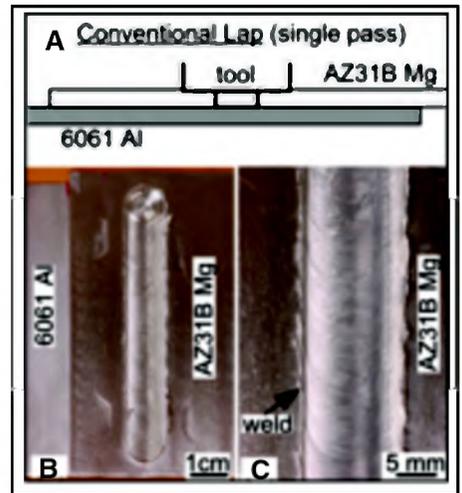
Single-pass weld in a conventional lap joint (CL-2) with AZ31 Mg on top of 6061 Al. A — Material position; B — top view overall; C — top view enlarged.
